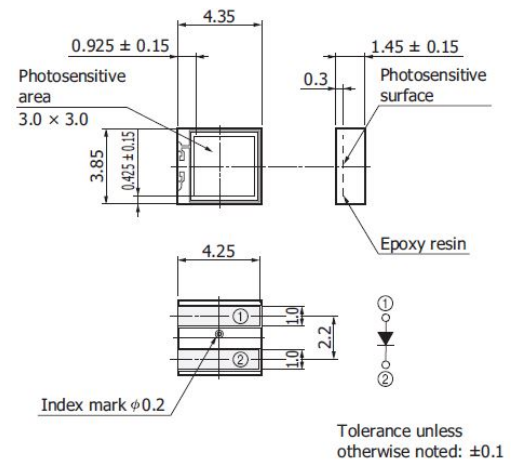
Hamamatsu S12572 MPPC surface mount package dimensions.
